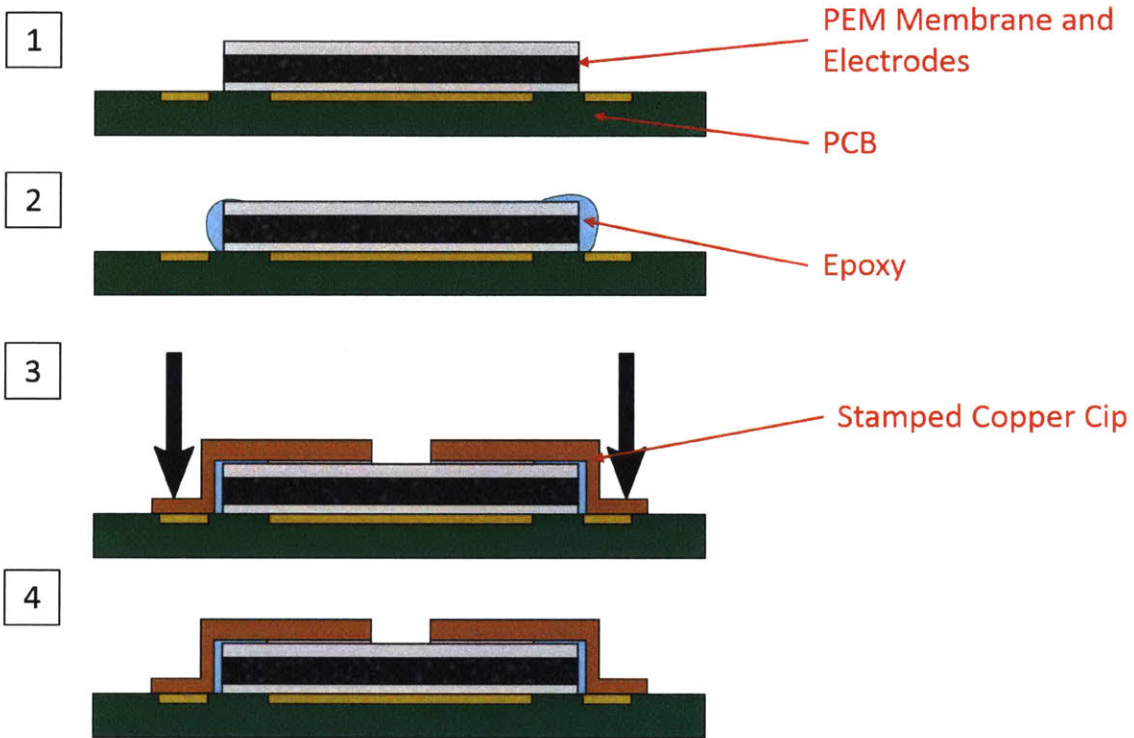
Assembly process of thin actuator. A PEM membrane and electrode assembly is positioned onto a custom PCB (1) and then lined with gap-filling epoxy (2). A custom stamped copper clip is then pressed against the assembly (3). After curing of the epoxy, the copper clip is removed (4). Fusion of the epoxy between the PCB and copper clip maintains the necessary compressive force on the membrane to reduce contact resistances, and the gap-filling epoxy eliminates gas leakage.
